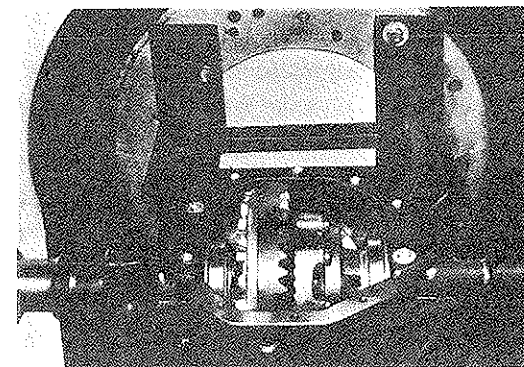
Mounting Front Axle Housing On Overhaul Stand
